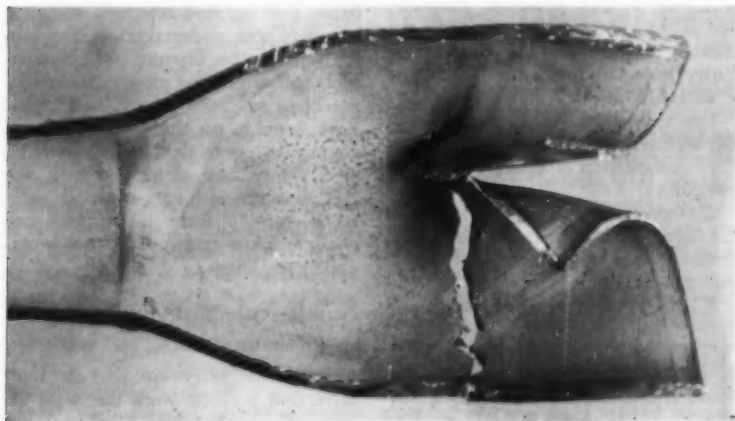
Corrosion-fatigue crack adjacent to the tube sheet on bell-end and finned Aluminum Brass tube (Mag. 4X).
